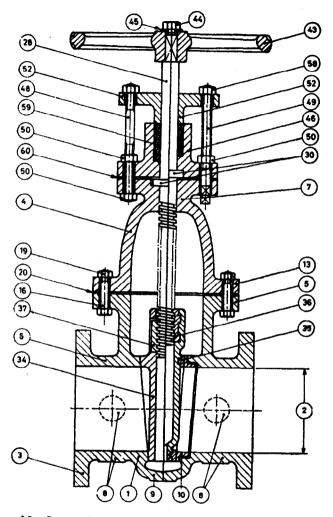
Inside Screw, Solid Wedge, Non-Rising Stem
